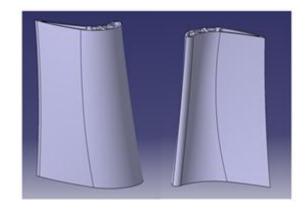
Three- dimensional blade model showing pressure and suction side.
